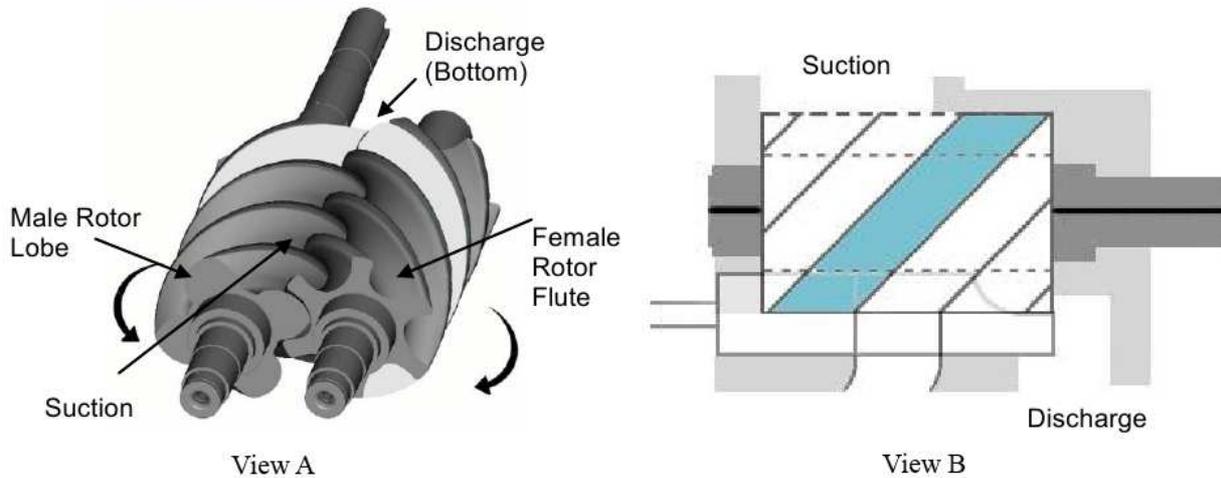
Rotary screw compressor a) male and female rotors b) cross-sectional view of the compressor [1]
